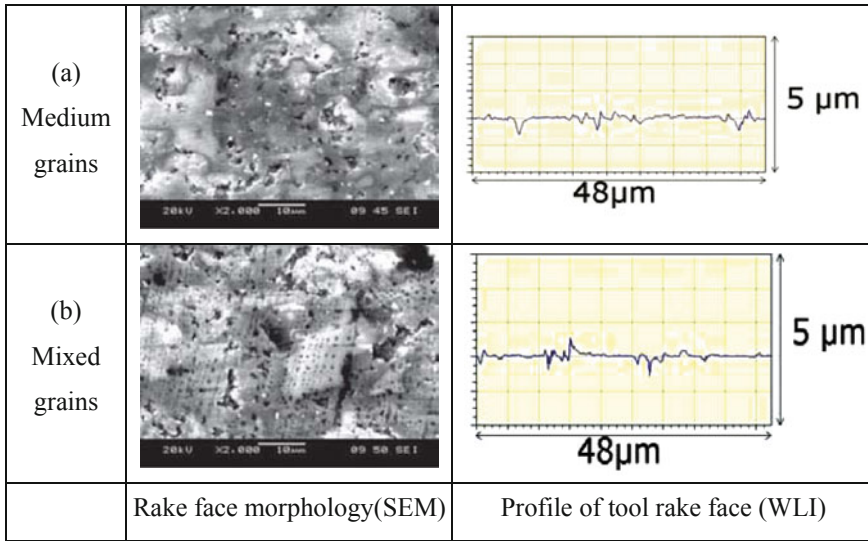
PCD tools: PCD A (a), PCD B (b)
